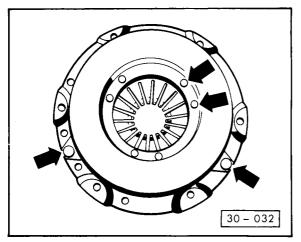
Checking the spring connections between pressure plate and cover for cracks, tightness of rivets and firm fitting
